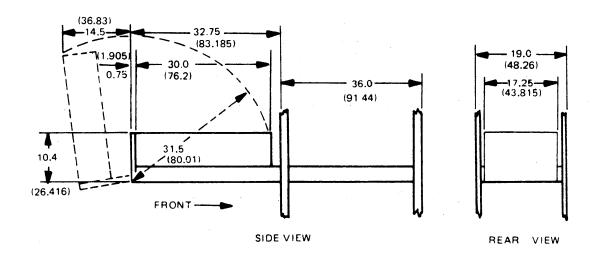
Clearances - CDC 9762 Acoustic Drawer
